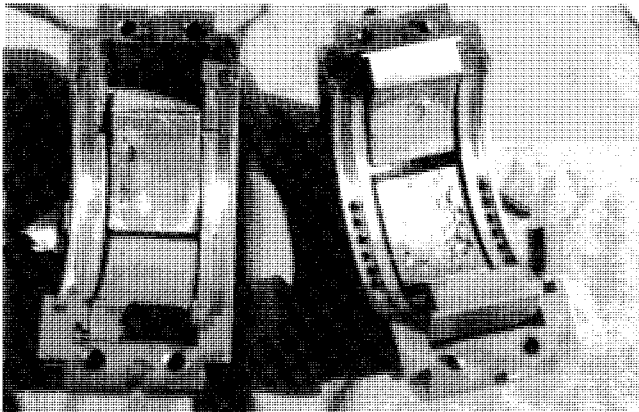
Original Tilting-Pad Journal Bearing. Note babbitt fatigue damage toward one end of bearing, which indicates misalignment.
